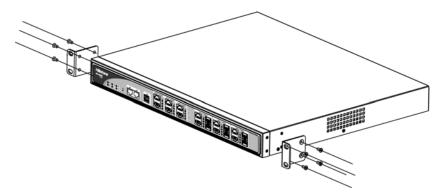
Installing the Rack-mounting Ears (1U Chassis as example)
